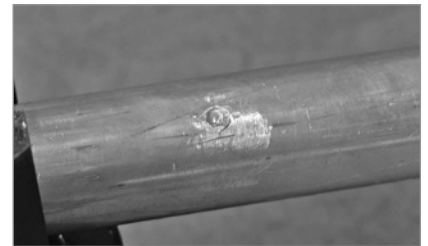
Peen edge of filler hole over top surface of plug.
